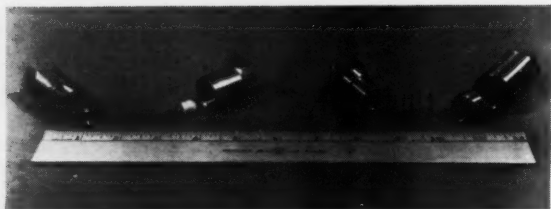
1/4-IN. STAINLESS STEEL CHECK VALVES
